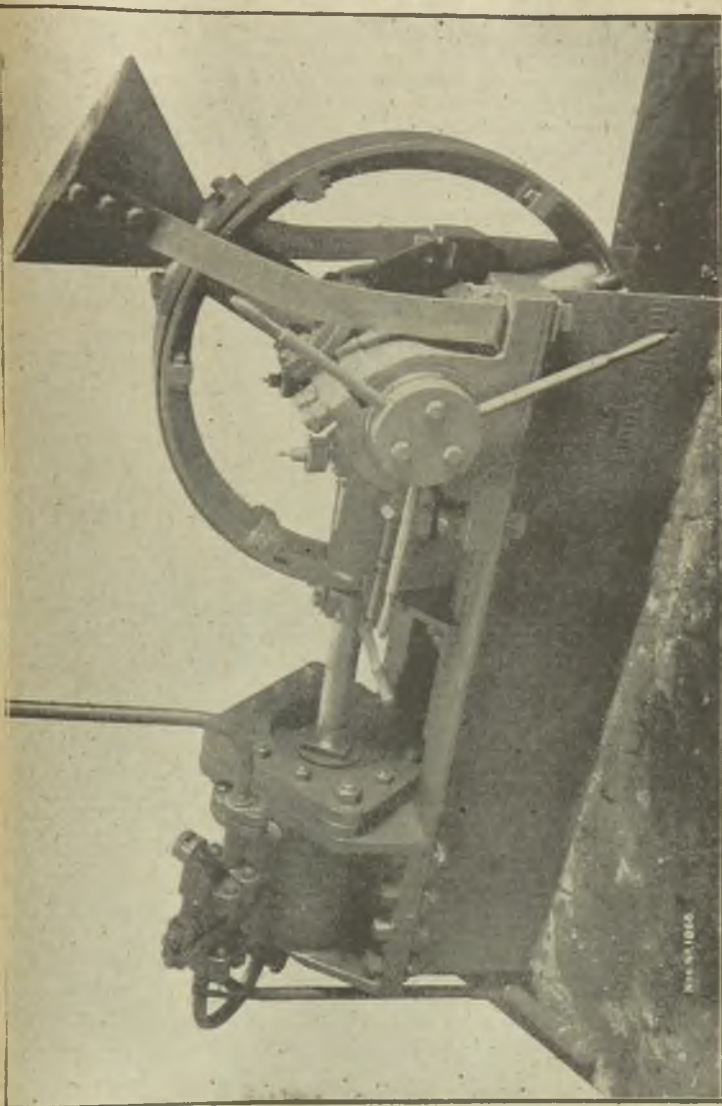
BRIQUETTING MACHINE DESIGNED SPECIALLY FOR THE PURPOSE OF BRIQUETTING CAST-IRON BORINGS.
